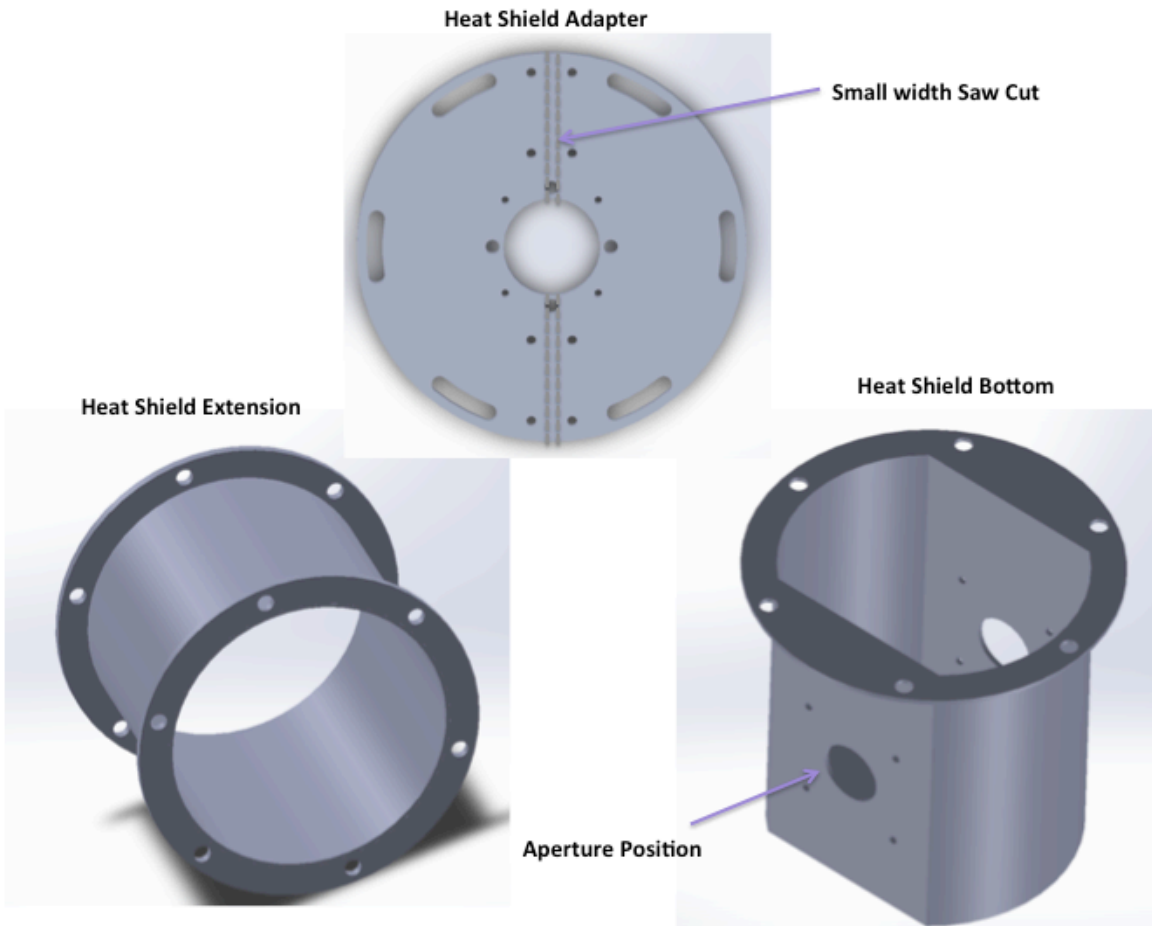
This is a schematic of the heat shield assembly. The heat shield adapter plate is connected directly to the LT-4B cryostat assembly by mounting onto the custom radiation shield mount. Two tunable, stainless steel apertures mount onto the heat shield bottom. There is a place to mount a pulse valve on the heat shield bottom.
